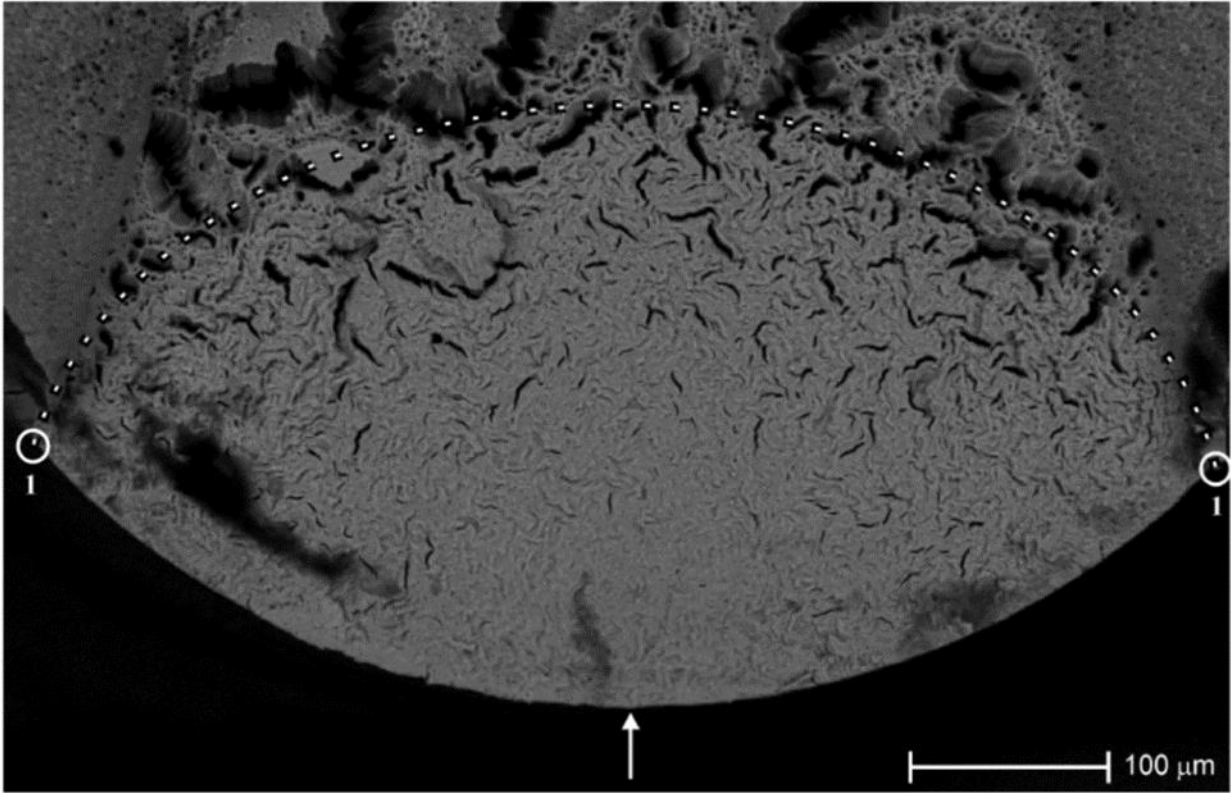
Closer Image of Surface-initiated Fatigue Crack in Heavily Drawn Steel Wire [ref. 9]
